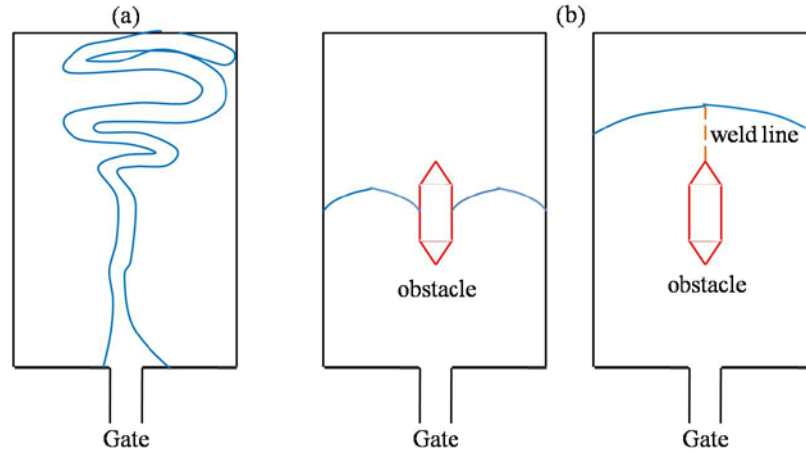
Common problems encountered in the injection molding of TLCPs: (a) jetting, and (b) the formation of a hot weld line.
